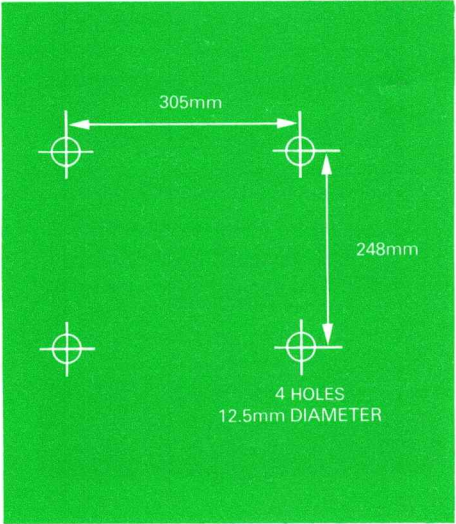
HOLE FIXING CENTRES – PROJECTION MOUNTED PATTERN
